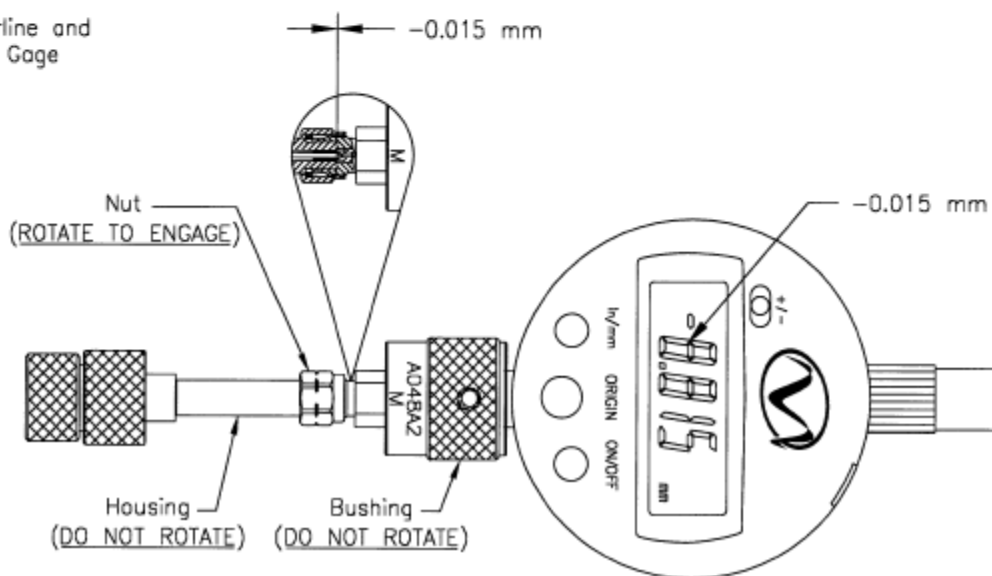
Gaging Beadless Precision 1.85mm and 2.4mm Airlines
